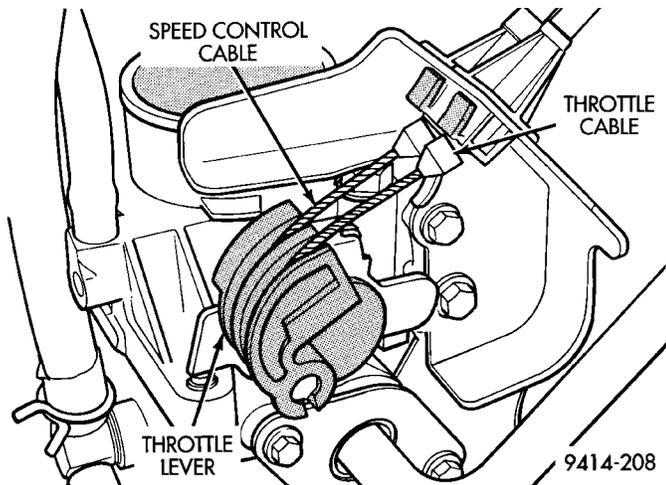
Throttle Cable Attachment to Throttle Body—Manual Transmission
